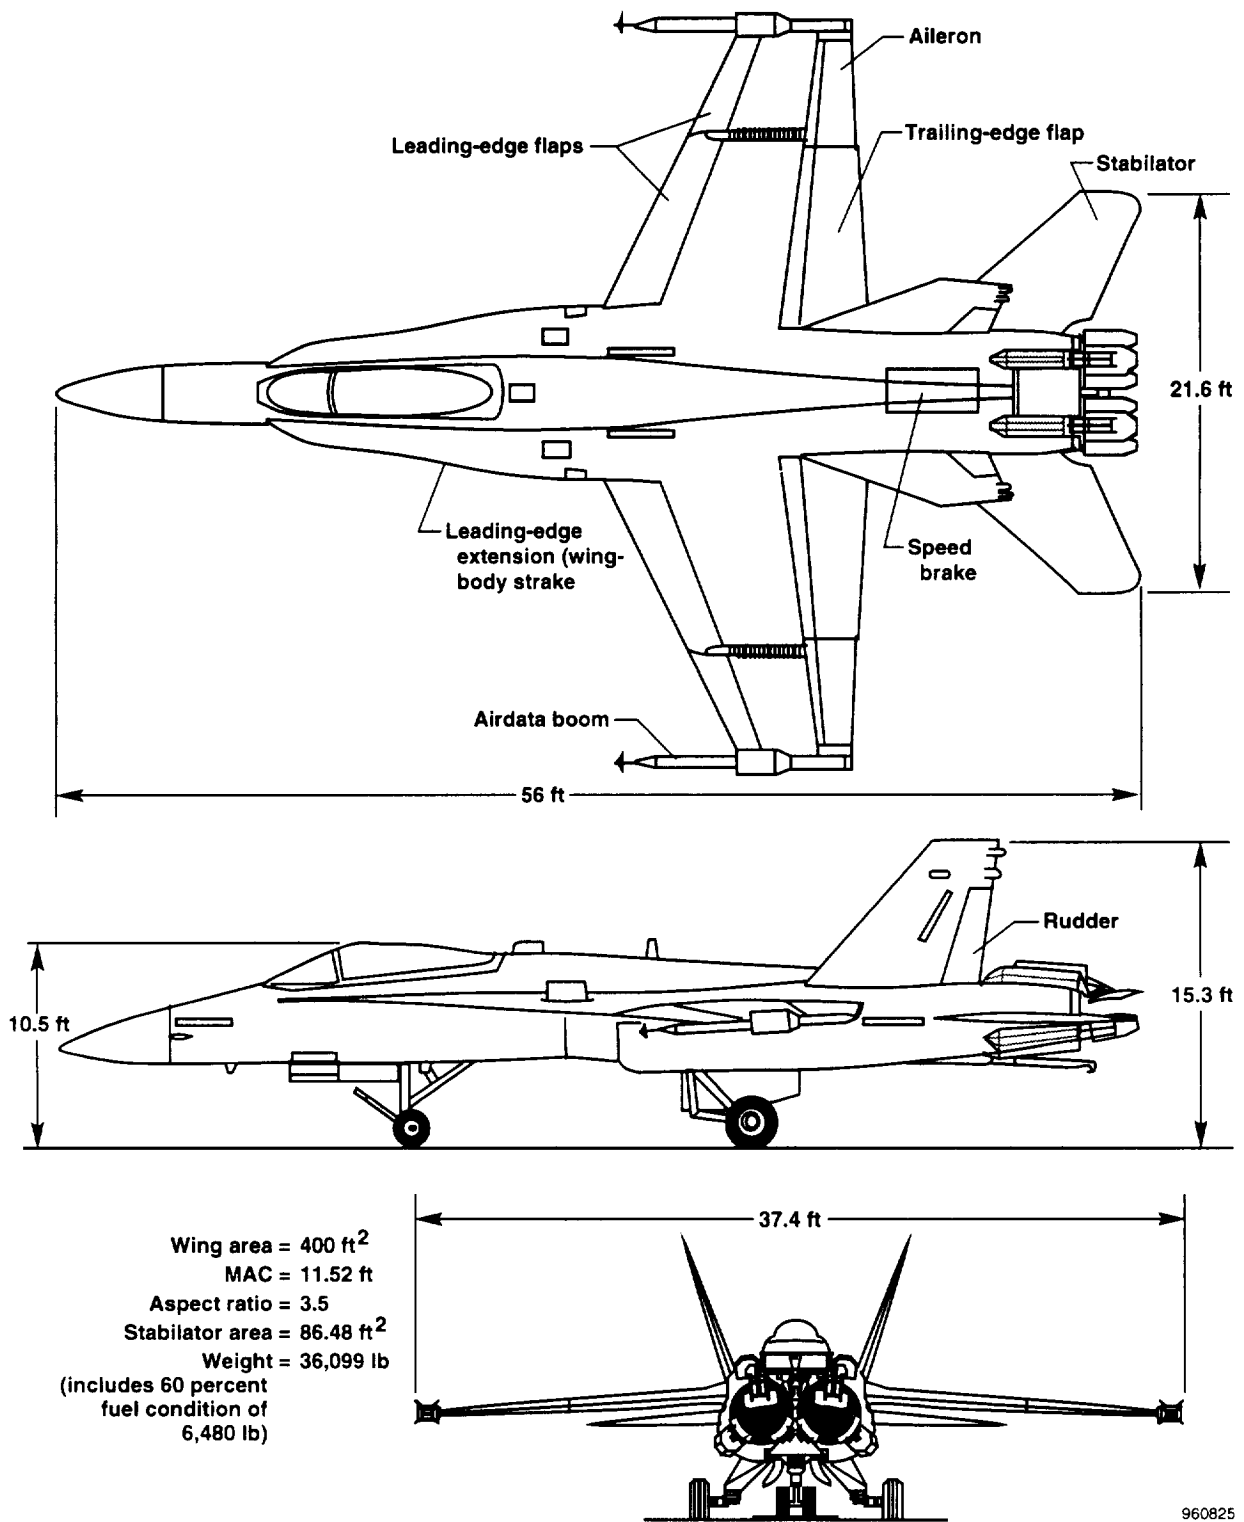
Three-view drawing of the F-18 HARV with major dimensions shown.
